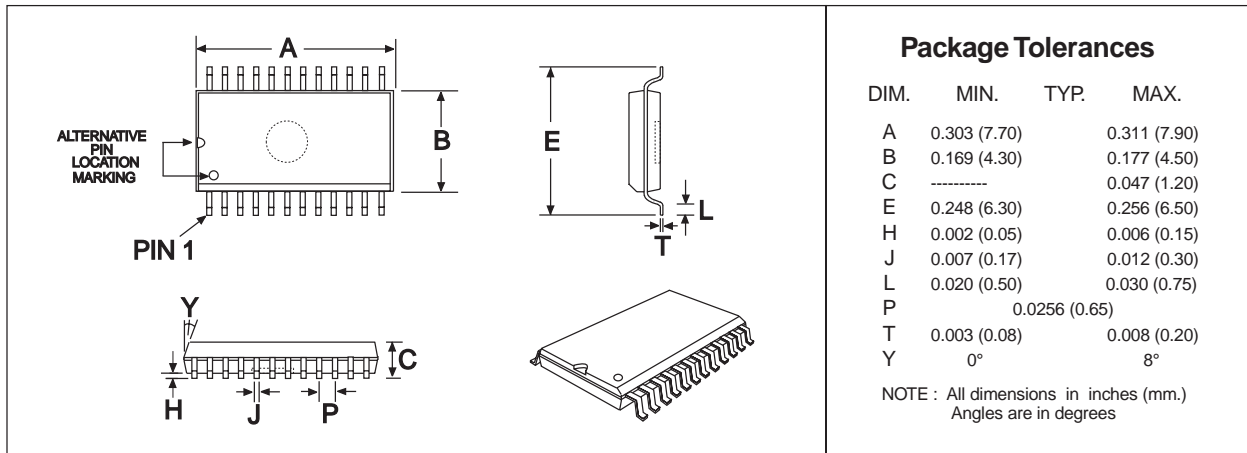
24-pin TSSOP Mechanical outline: *Order as part no. MX604TN
